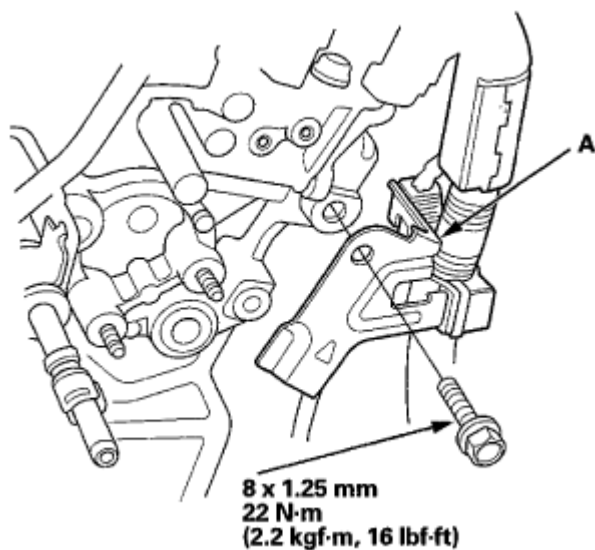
Identifying Rear Cylinder Head Harness Bracket With Mounting Bolt Torque Specification
